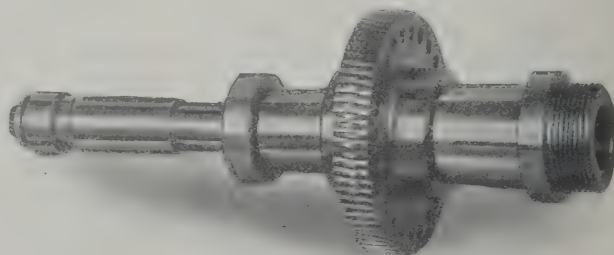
Dividing Head Spindle and Worm-wheel Assembled
